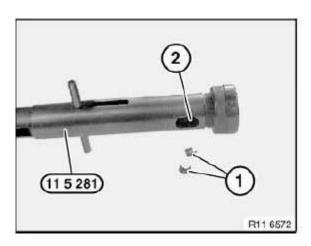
Identifying Keys, Working Chamber And Special Tool (11 5 281) Courtesy of BMW OF NORTH AMERICA, INC.
